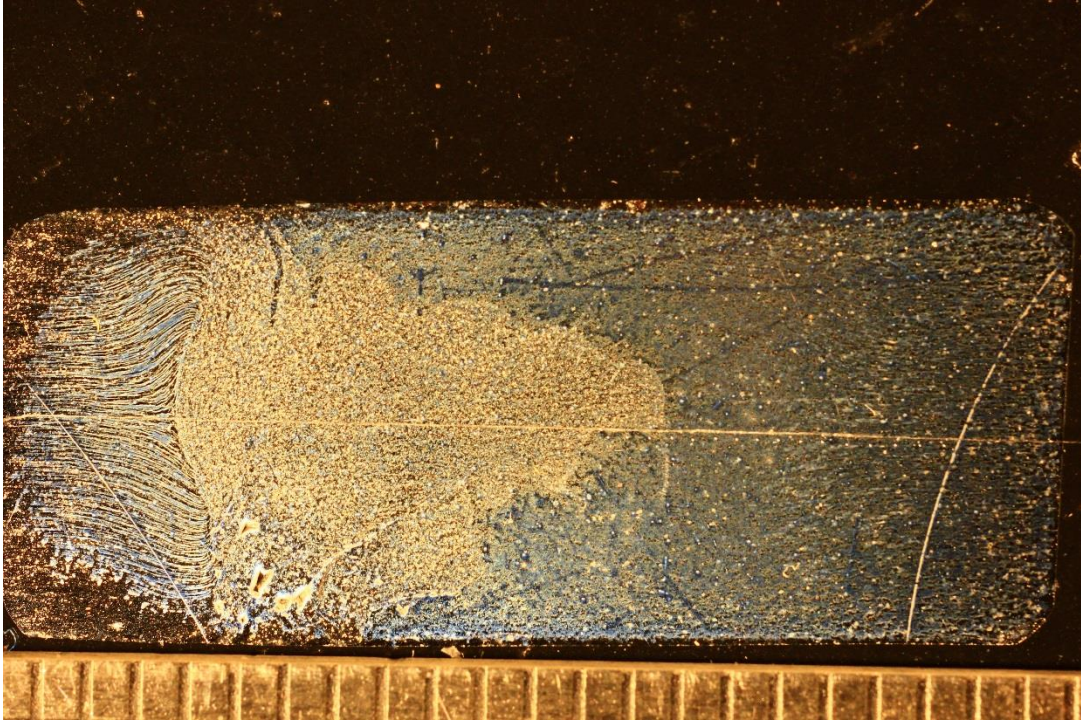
Macrograph of Weld 6 Sample 5
